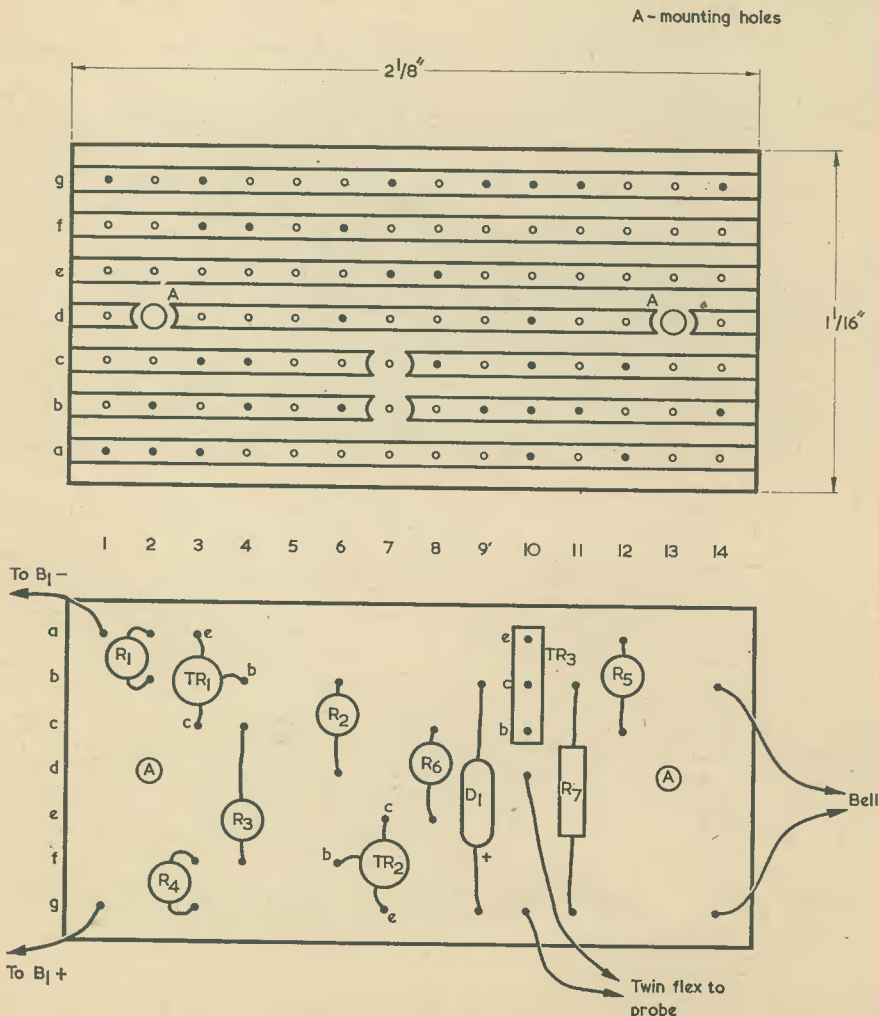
The copper and component sides of the Veroboard on which the components are assembled
